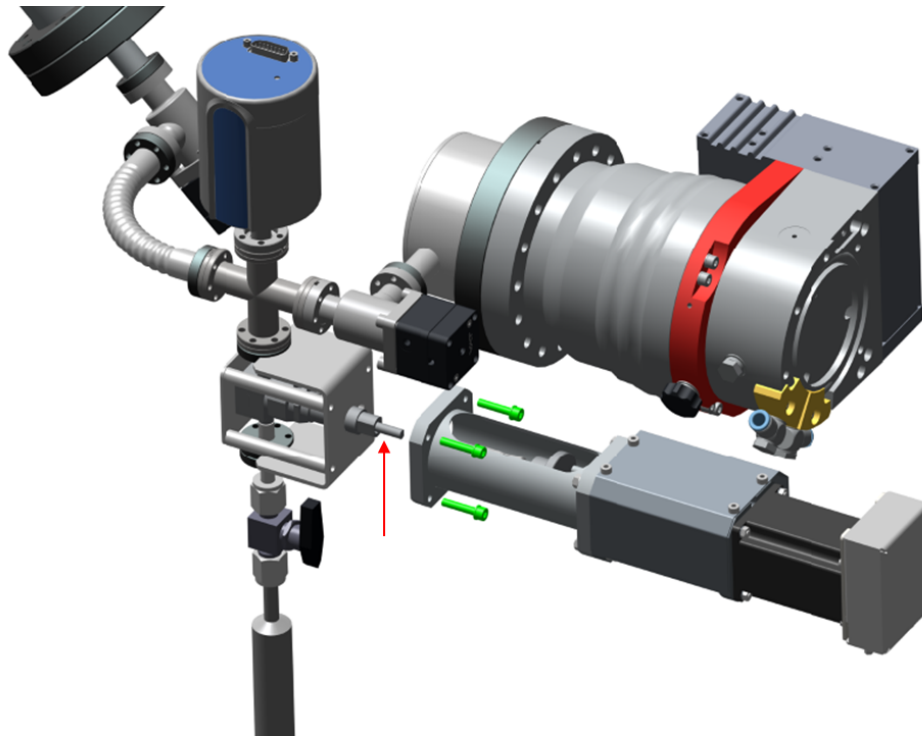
Schematic showing the valve drive removed, the red arrow indicates the area that may require lubrication.
